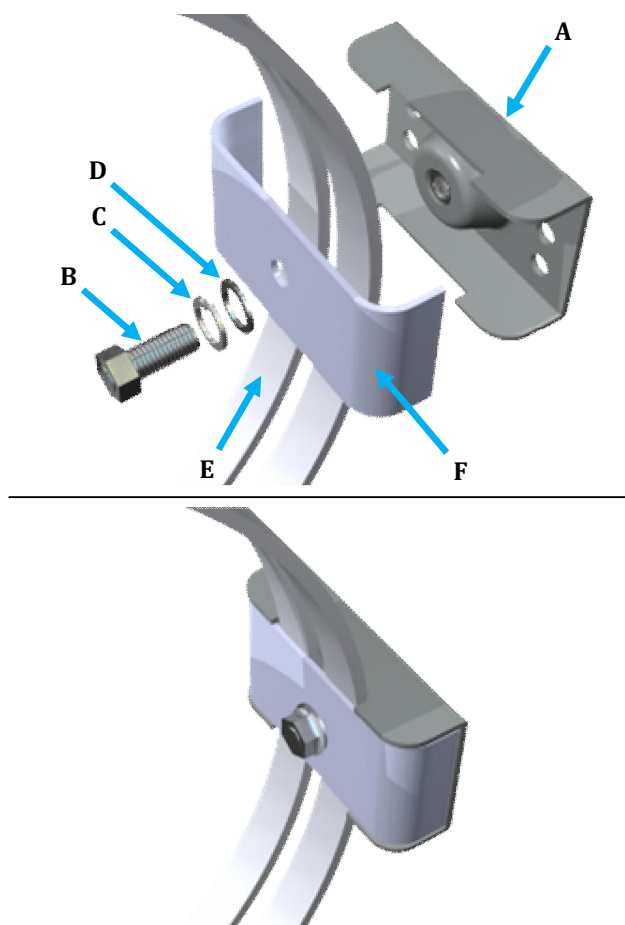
Yoke Assembly Mounting (Vertical Shown)
